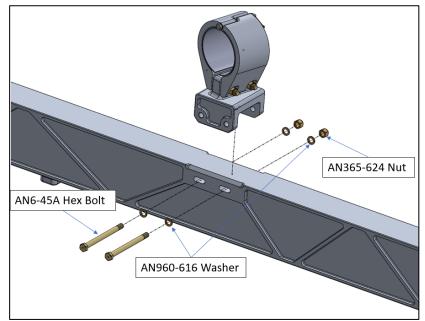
AFM-130-20 Forward Clamp Assembly Installation onto the AFM-130-10 Main Beam Assembly
